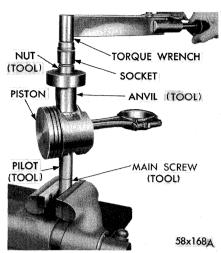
Testing Fit on Piston Pin in Connecting Rod
